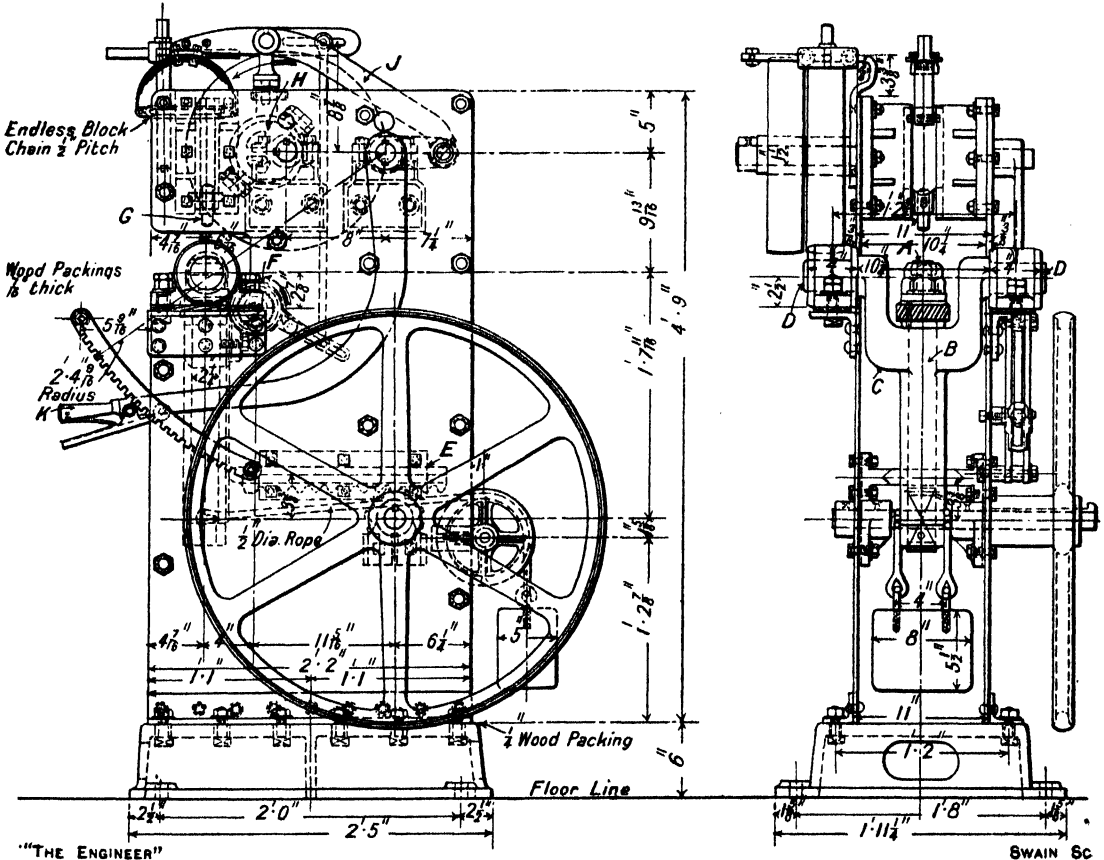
HALEY AND PINDER DIE-BATTERING MACHINE—G. CROSSLEY.
